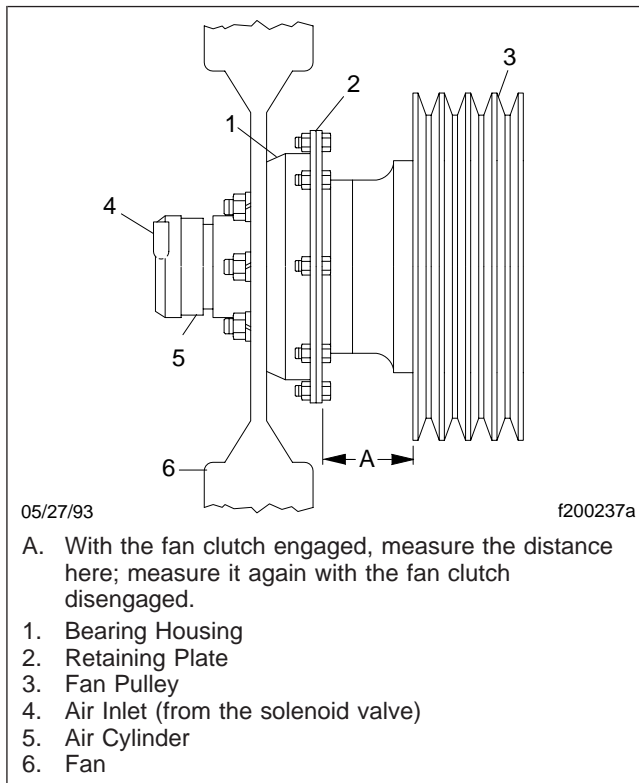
, Kysor/Dynair and Kysor K22RA Fan Clutch Lining Wear Checking
